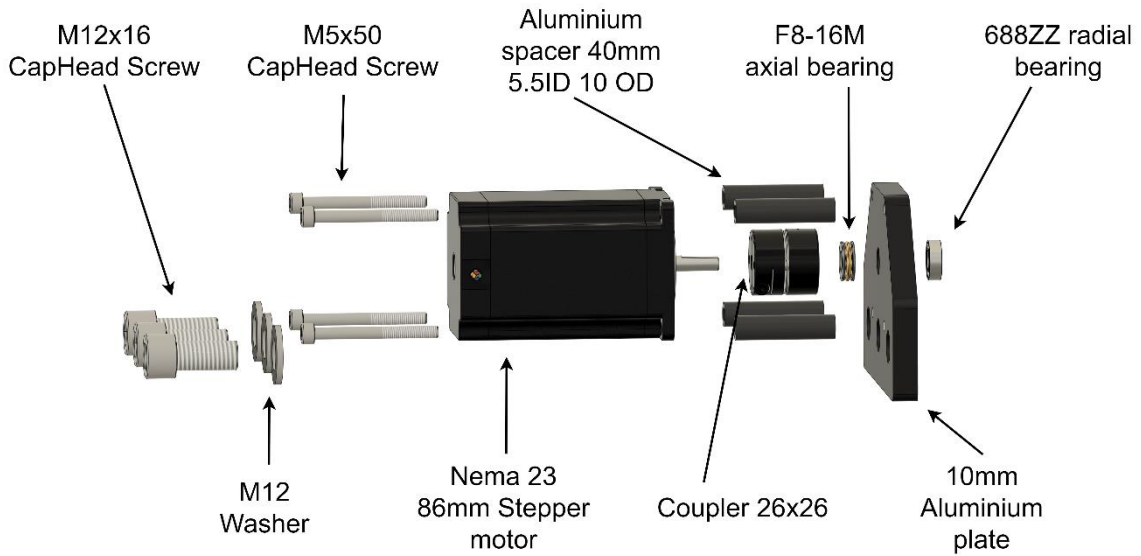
Stepper motor mount assembly, where all components can be observed as well as the assembly order.
